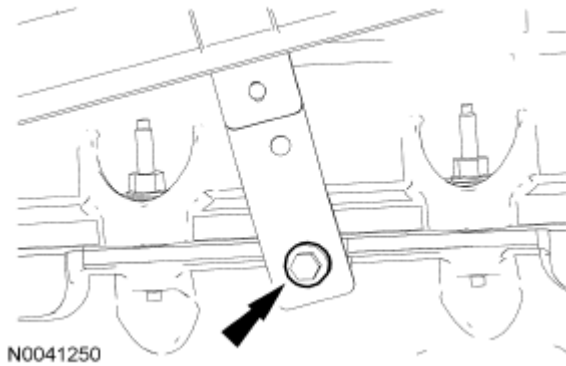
Locating PSP Hose Bracket To Cylinder Head Bolt
